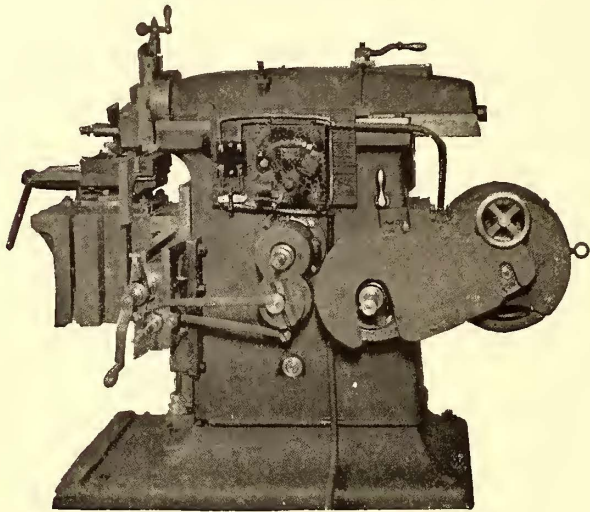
SHOWING 2-HP MOTOR MOUNTED AT SIDE OF 16-IN. SHAPER
